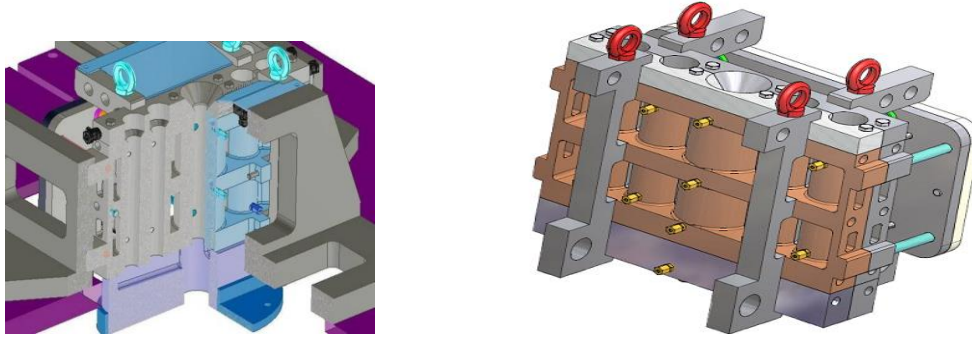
Designed permanent mold with downsprue and runner for (a) low pressure die casting and (b) gravity casting
